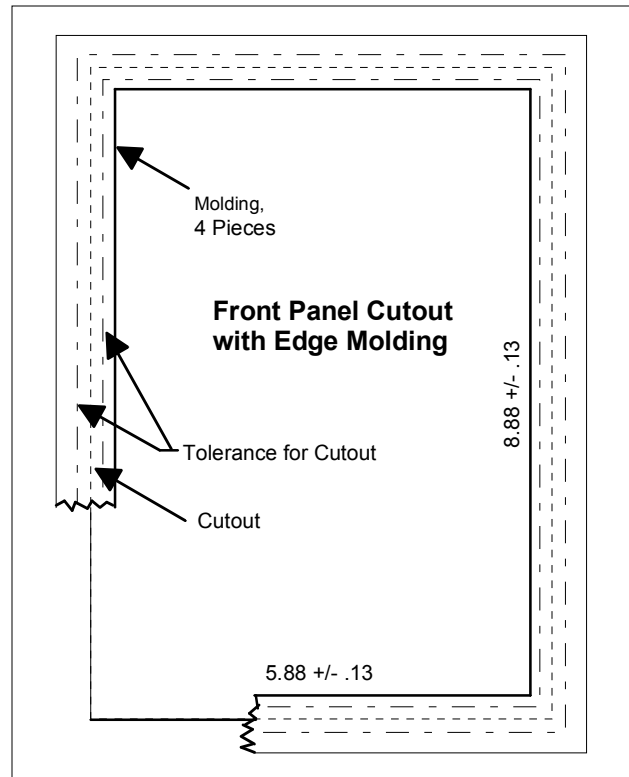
, "Control panel installation with TCU mounted to front panel"
